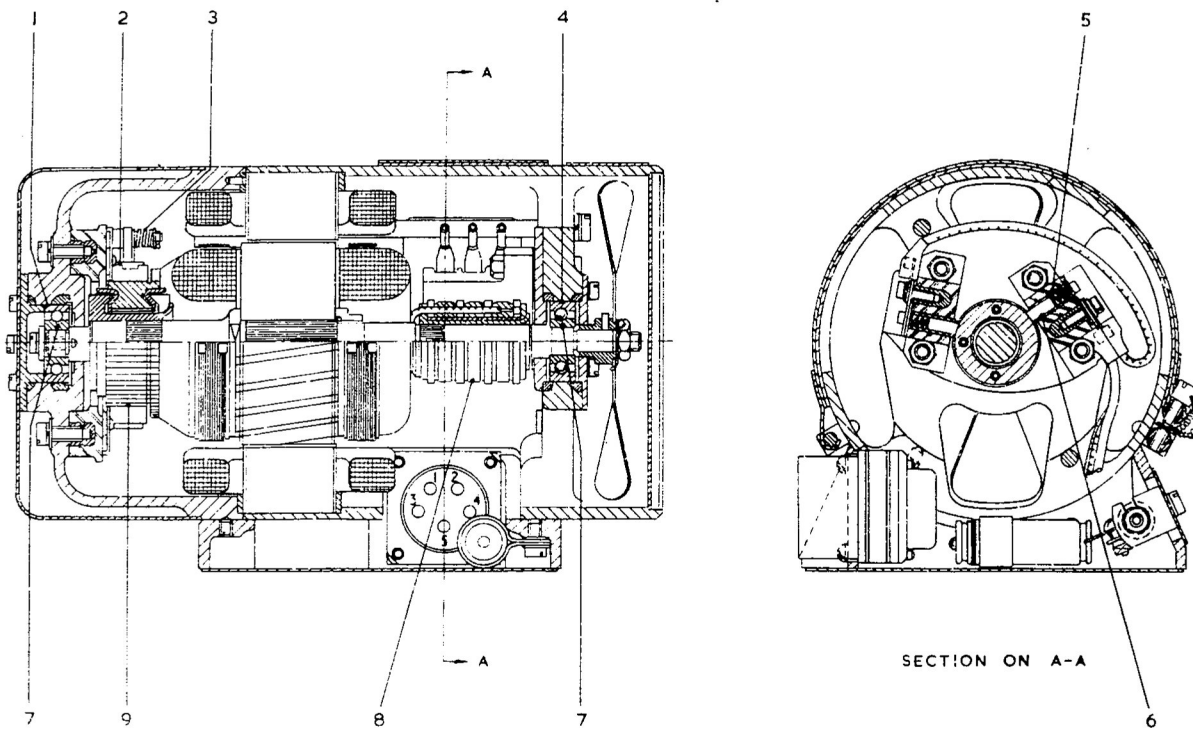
Rotary inverters Type 100A and 100C (sectional view)
